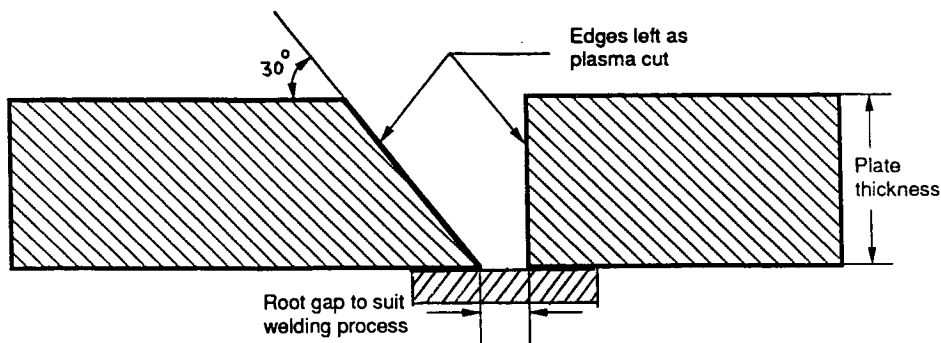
Weld preparation for the single-bevel butt joint.
